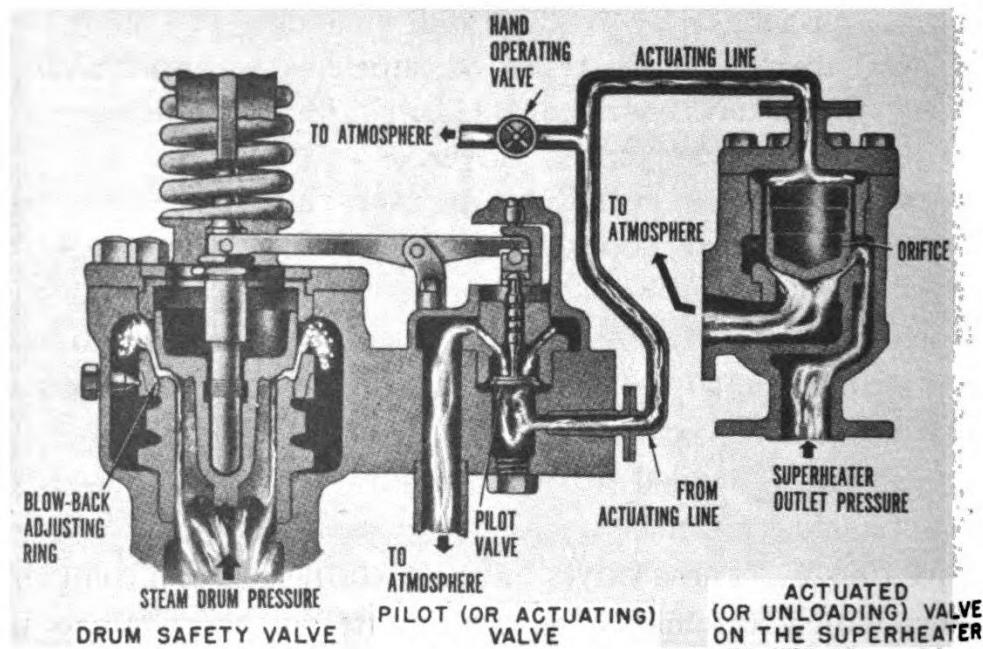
Pressure pilot-operated superheater outlet safety valve assembly.
